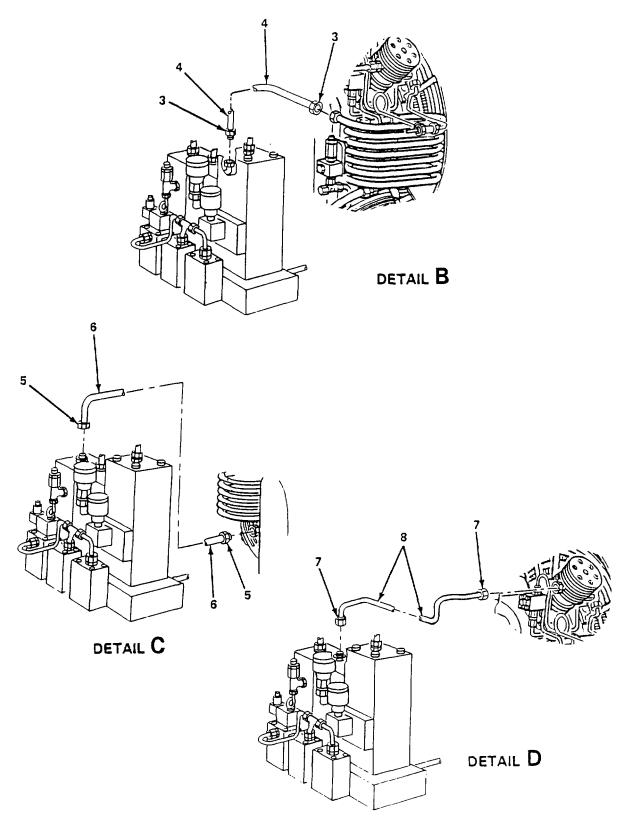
Compressor Assembly, Replace (Sheet 2 of 3).
